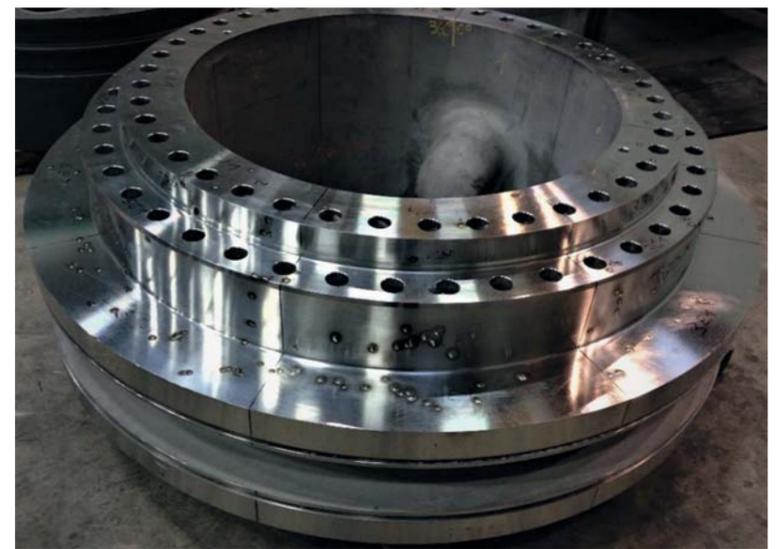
A casted duplex stainless steel inner housing of a swivel.
